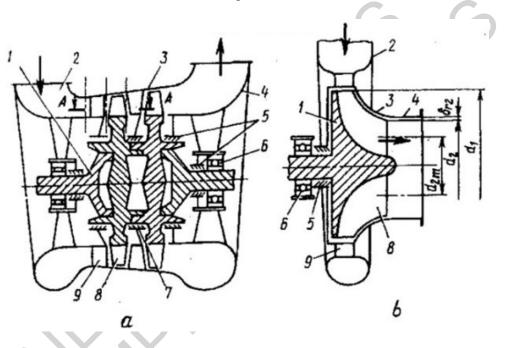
Schemes of the main types of turbines: a – axial turbine; b – radial-axial flow (centripetal) turbine. 1 – rotor; 2 – inlet; 3 – stator; 4 – outlet; 5,7 – labyrinth seals; 6 – bearing; 8 – moving (rotating) blade; 9 – nozzle (guide) blade (vane)
